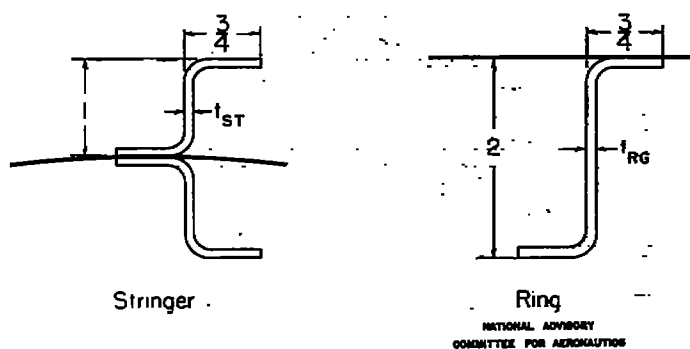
Nominal dimensions of test-cylinder stiffeners.
